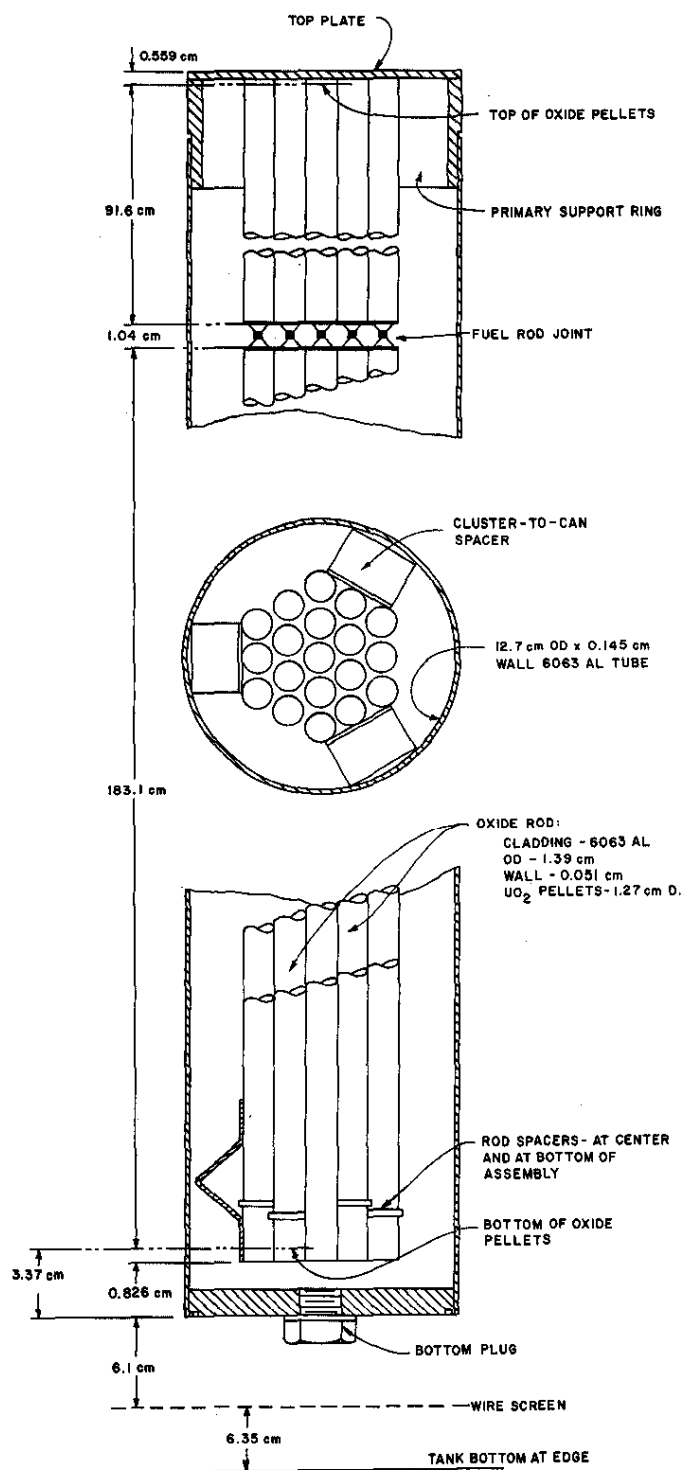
NINETEEN-ROD  $\text{UO}_2$  FUEL ASSEMBLY
